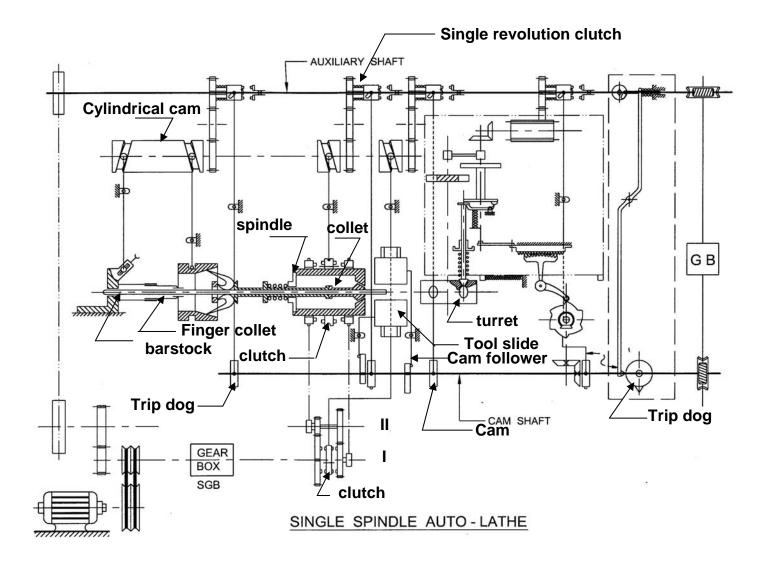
Typical kinematic system of single spindle automatic lathe.
